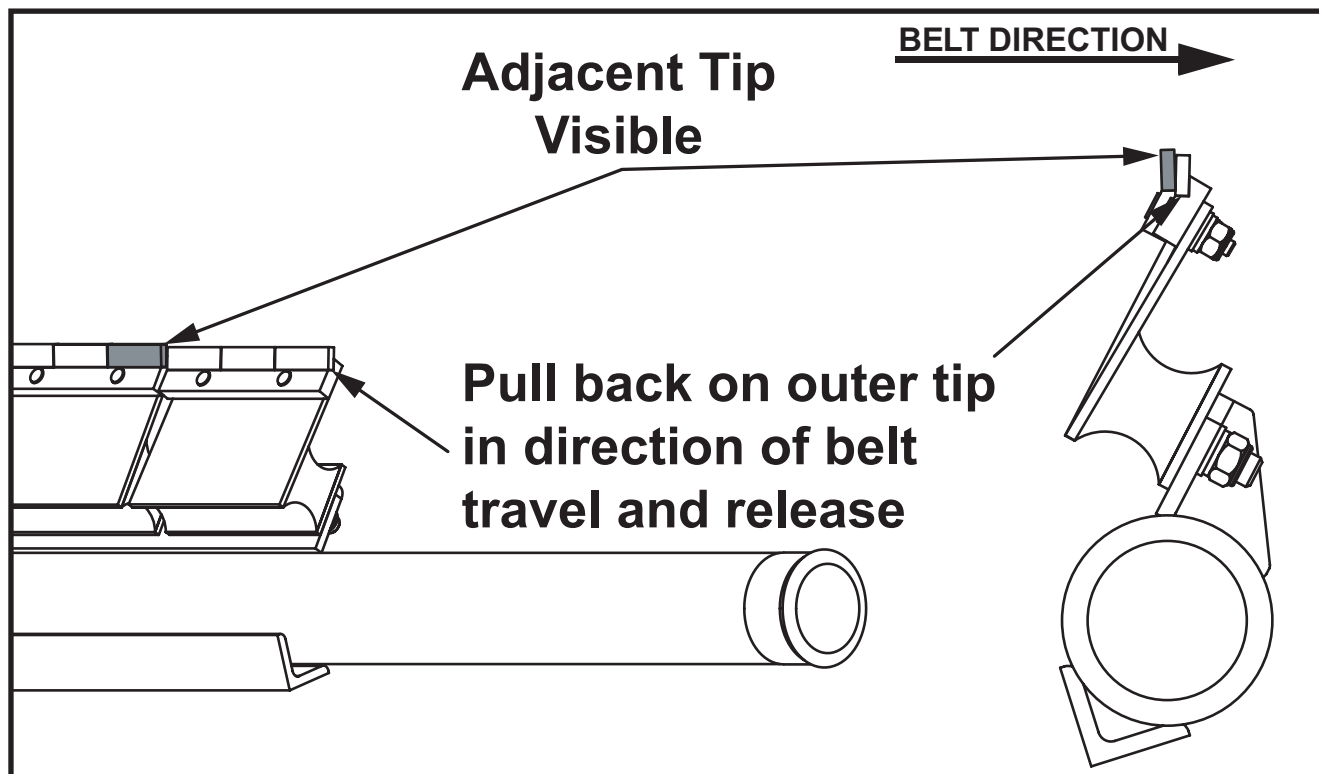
Martin® P2 Secondary Belt Cleaner HD Checking Tip Tension
